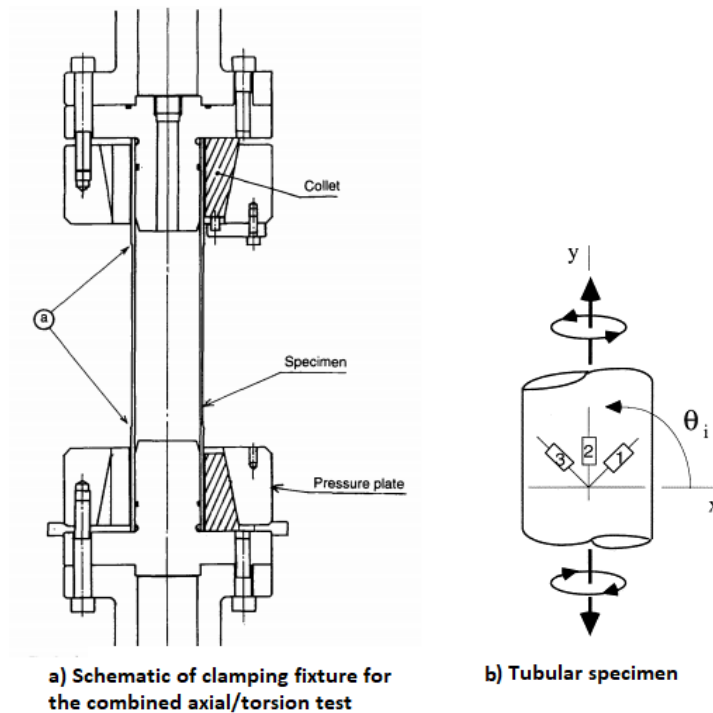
a) Apparatus of combined axial/torsion on tubular specimen [98]; b) geometry of specimen [99]
